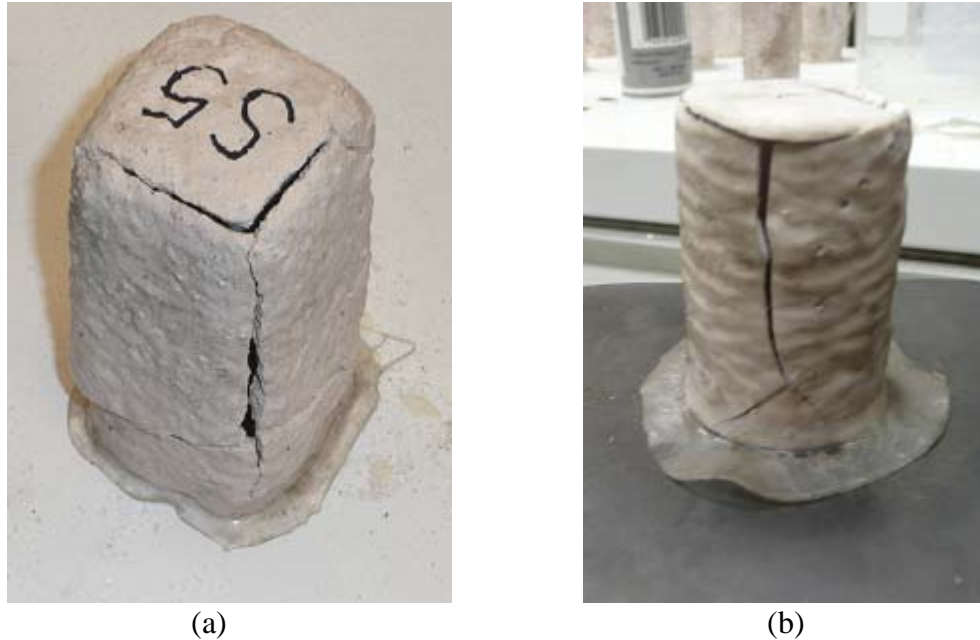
(a) Rectangular and (b) cylindrical test samples after burst testing
